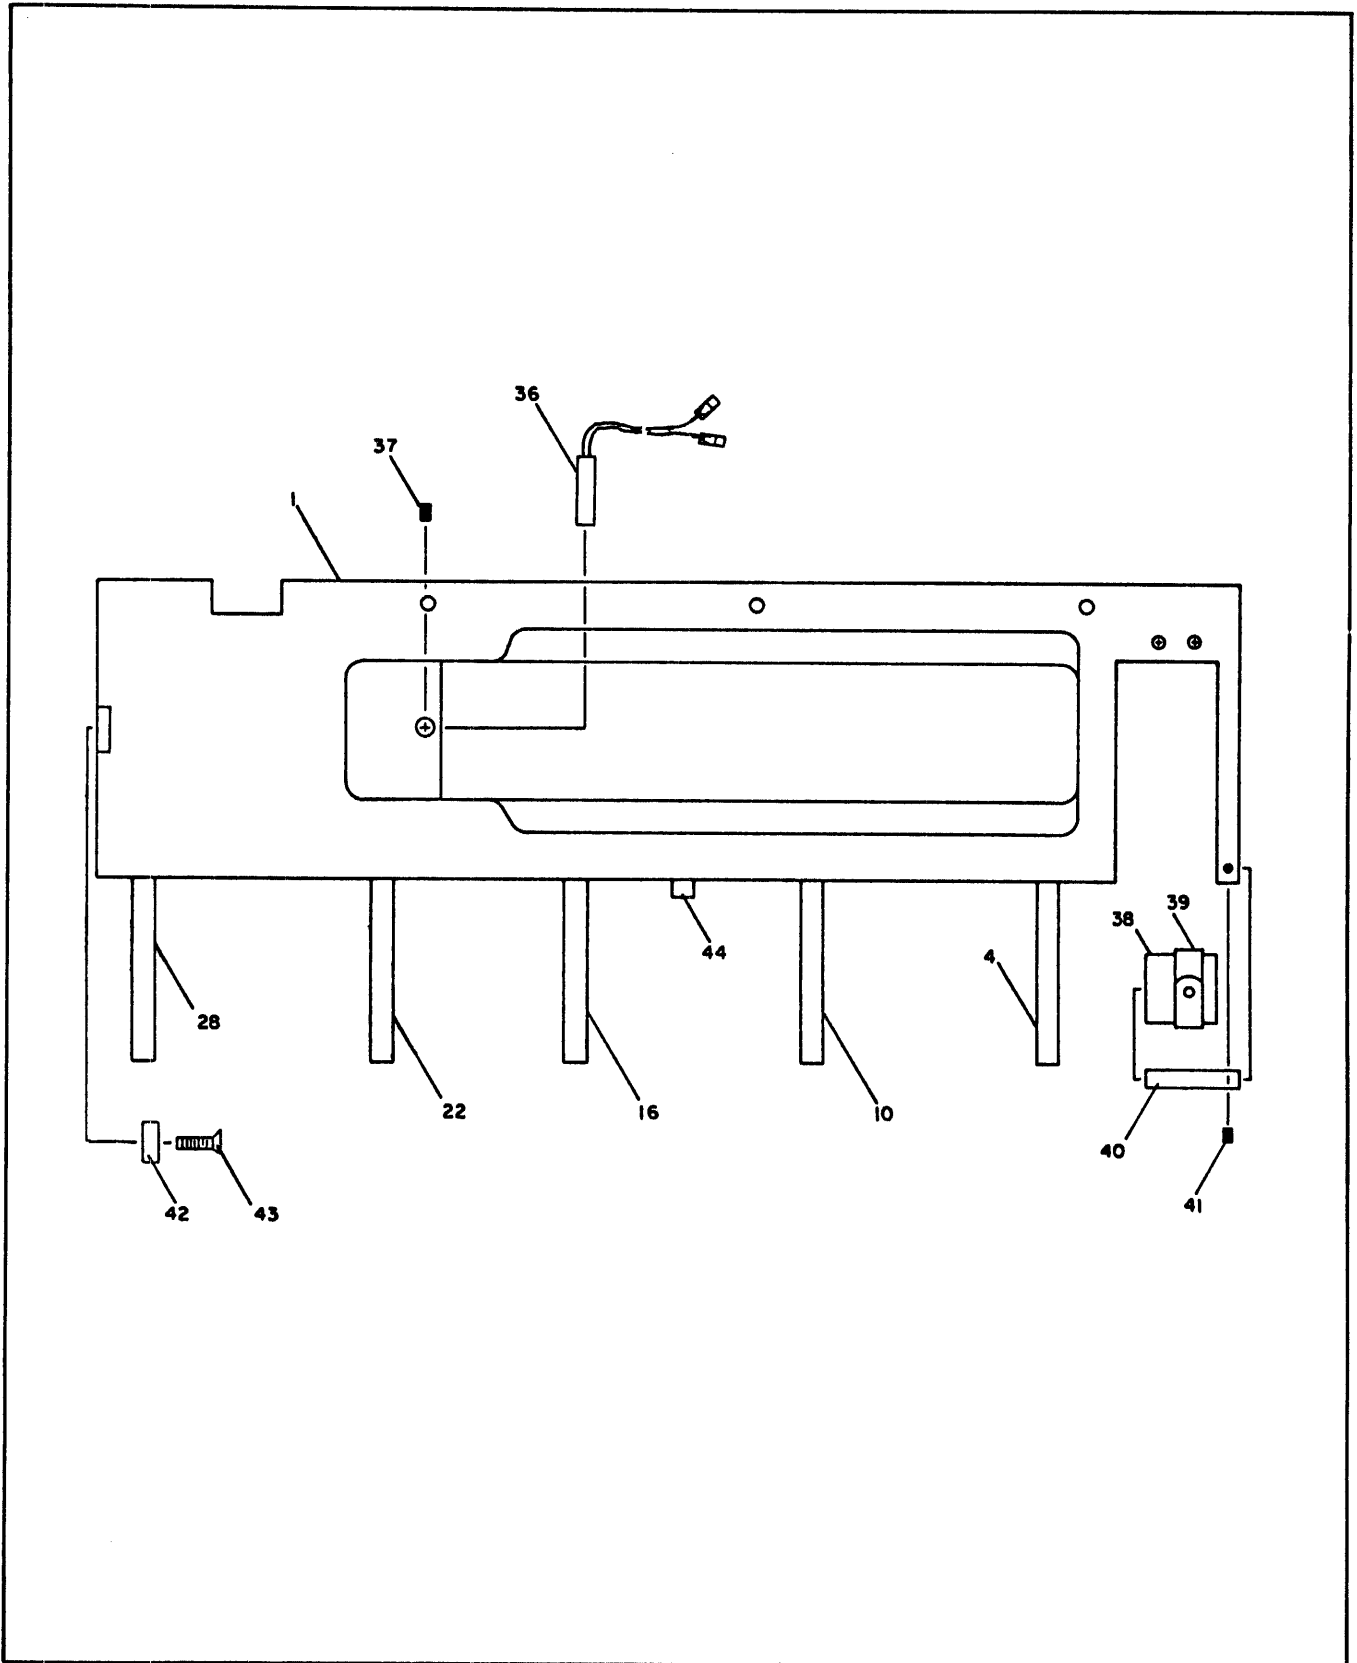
STACK SUPPORT ASSEMBLY (sheet 2 of 2)
